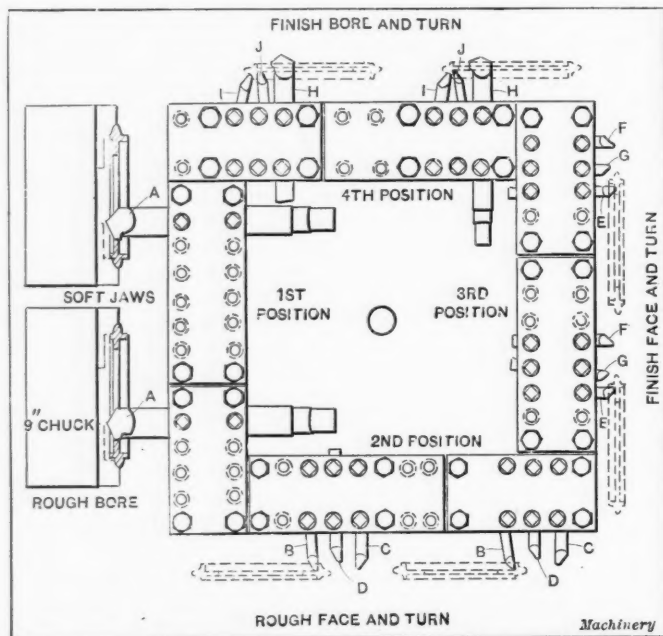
Diagram showing Tool Equipment and Successive Steps in Machining Sprocket Blanks on Double-spindle Flat Turret Lathe
